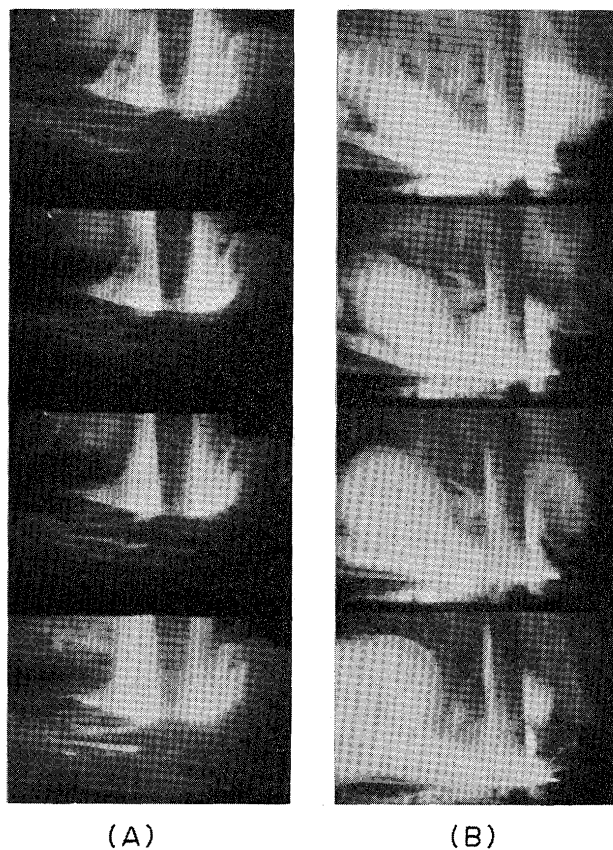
High-speed motion photograph of molten pool (3000 frames/sec). welding speed (A): 20 cm/min, (B): 60 cm/min
